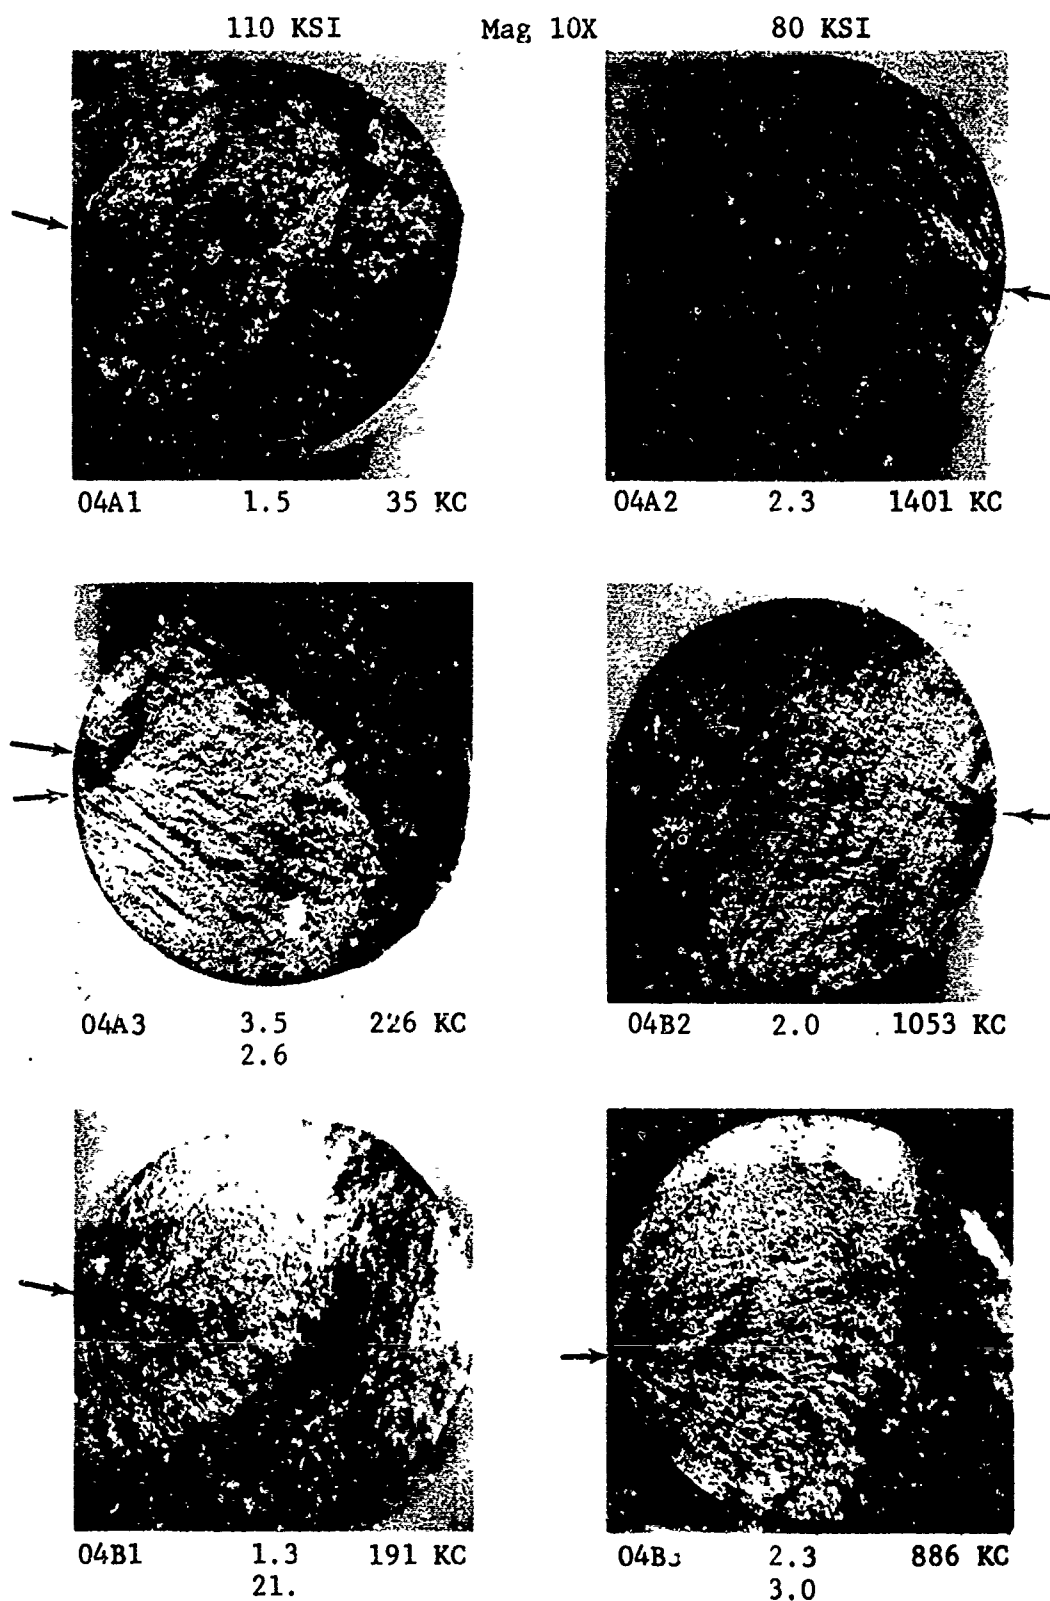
Fracture Surfaces of Failed Fatigue Specimens Series 04-Double-Bond/Single-Axis Diffusion Bonded with 1.5% Deformation
